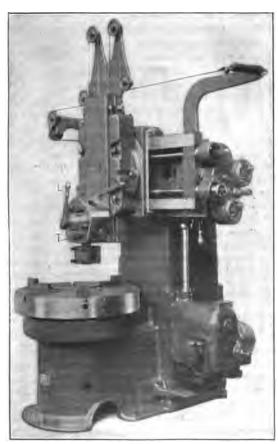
Small Boring and Turning Mill with Single Turret-head
